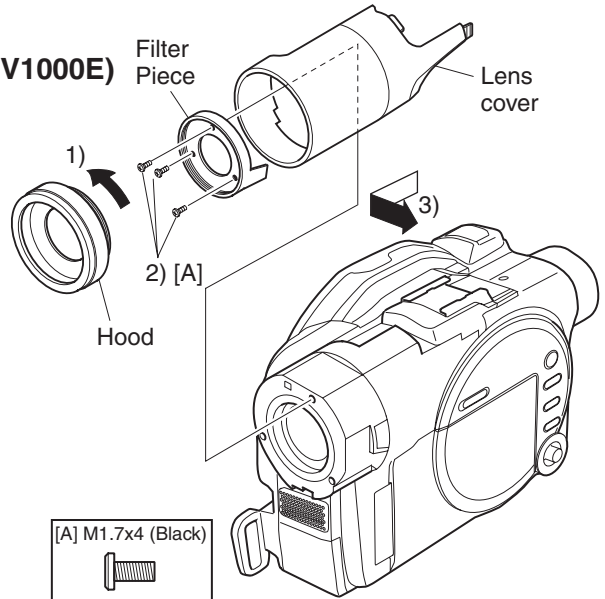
Hood, Filter Piece and Lens Cover
